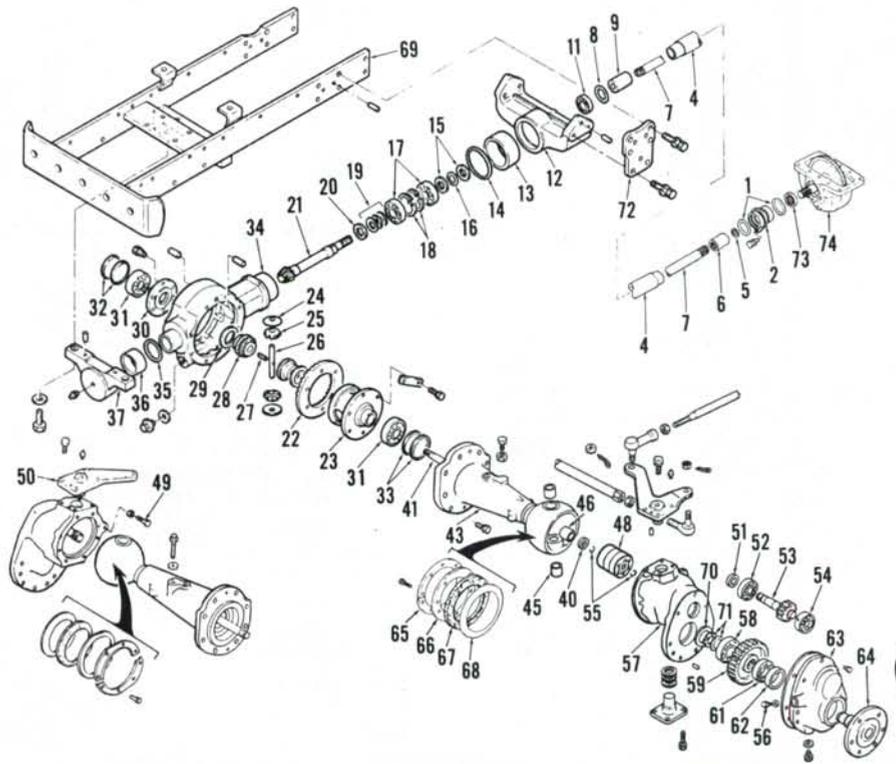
Exploded view of front wheel drive axle assembly used on 1300 models.
